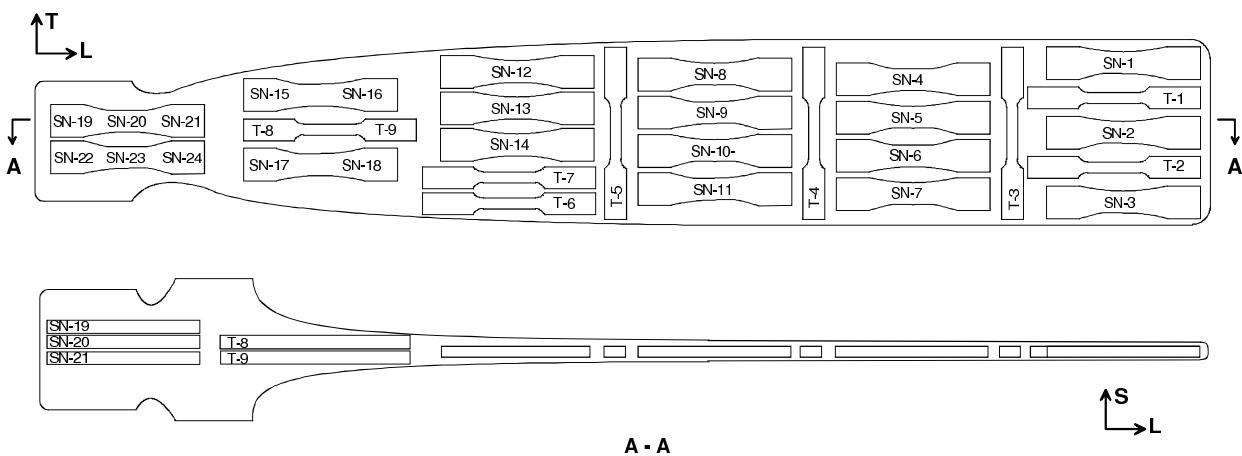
The location and orientation of tensile and uniaxial fatigue (S-N) specimens, with respect to the propeller spar forgings, shown schematically for blade 4.
